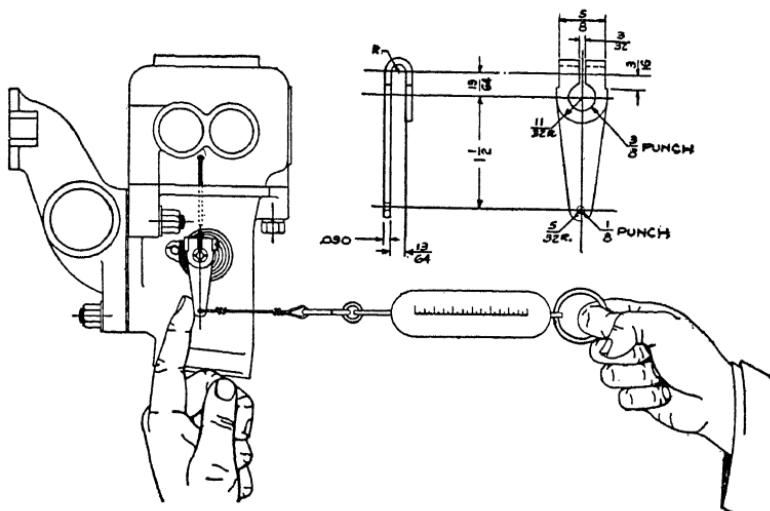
Checking 1937 Buick Heat Control Thermostat
